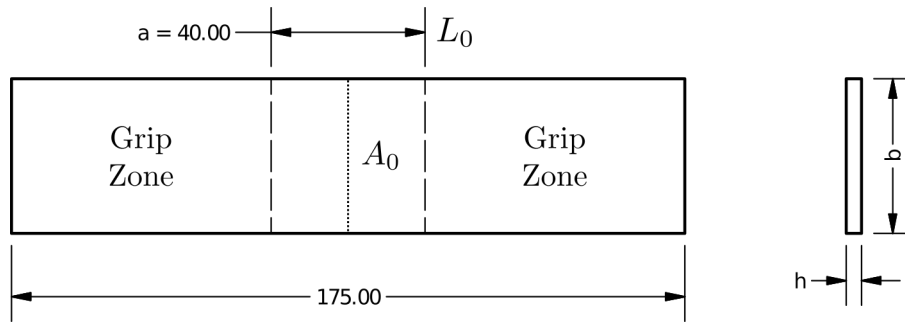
Plate buckling specimen drawings, dimension in mm
